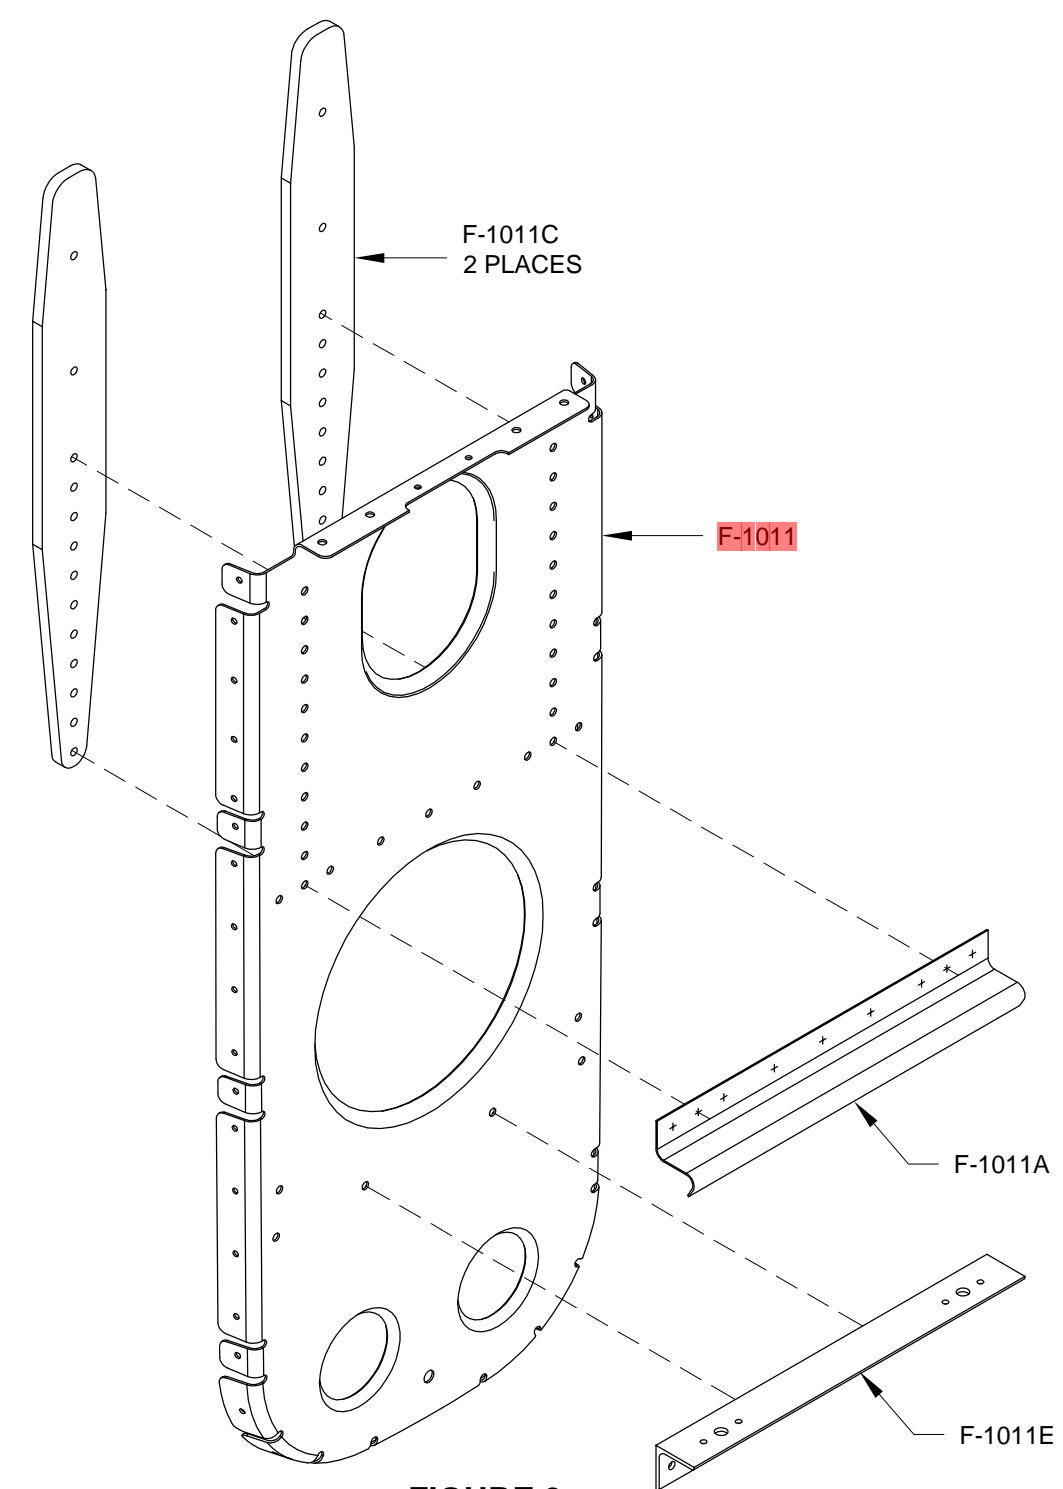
POSITIONING F-1011 BULKHEAD PARTS
